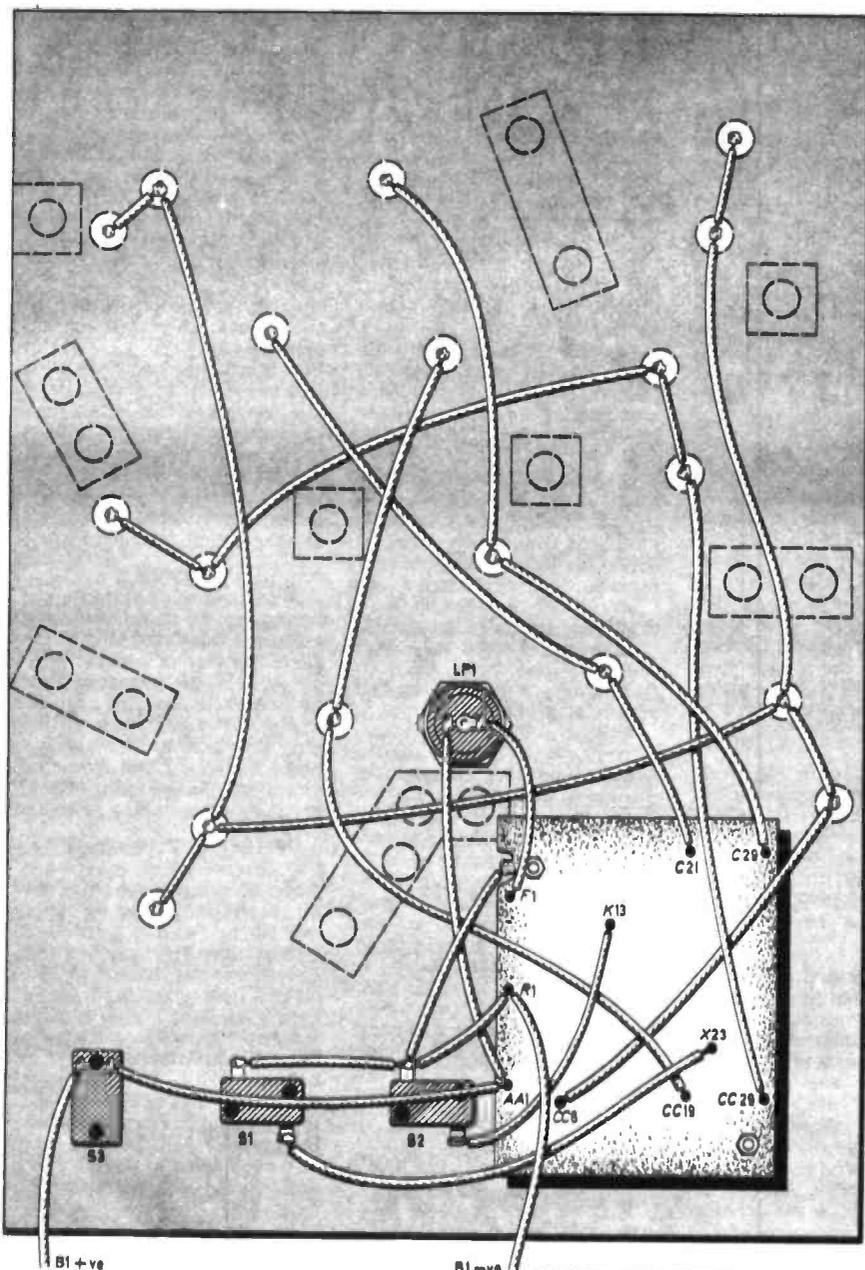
Underside view of the top panel showing complete wiring details from board to touch-plates and other panel mounted components. Note that the unused drawing pins have insulation tape covering them before the aluminium foil is laid.
